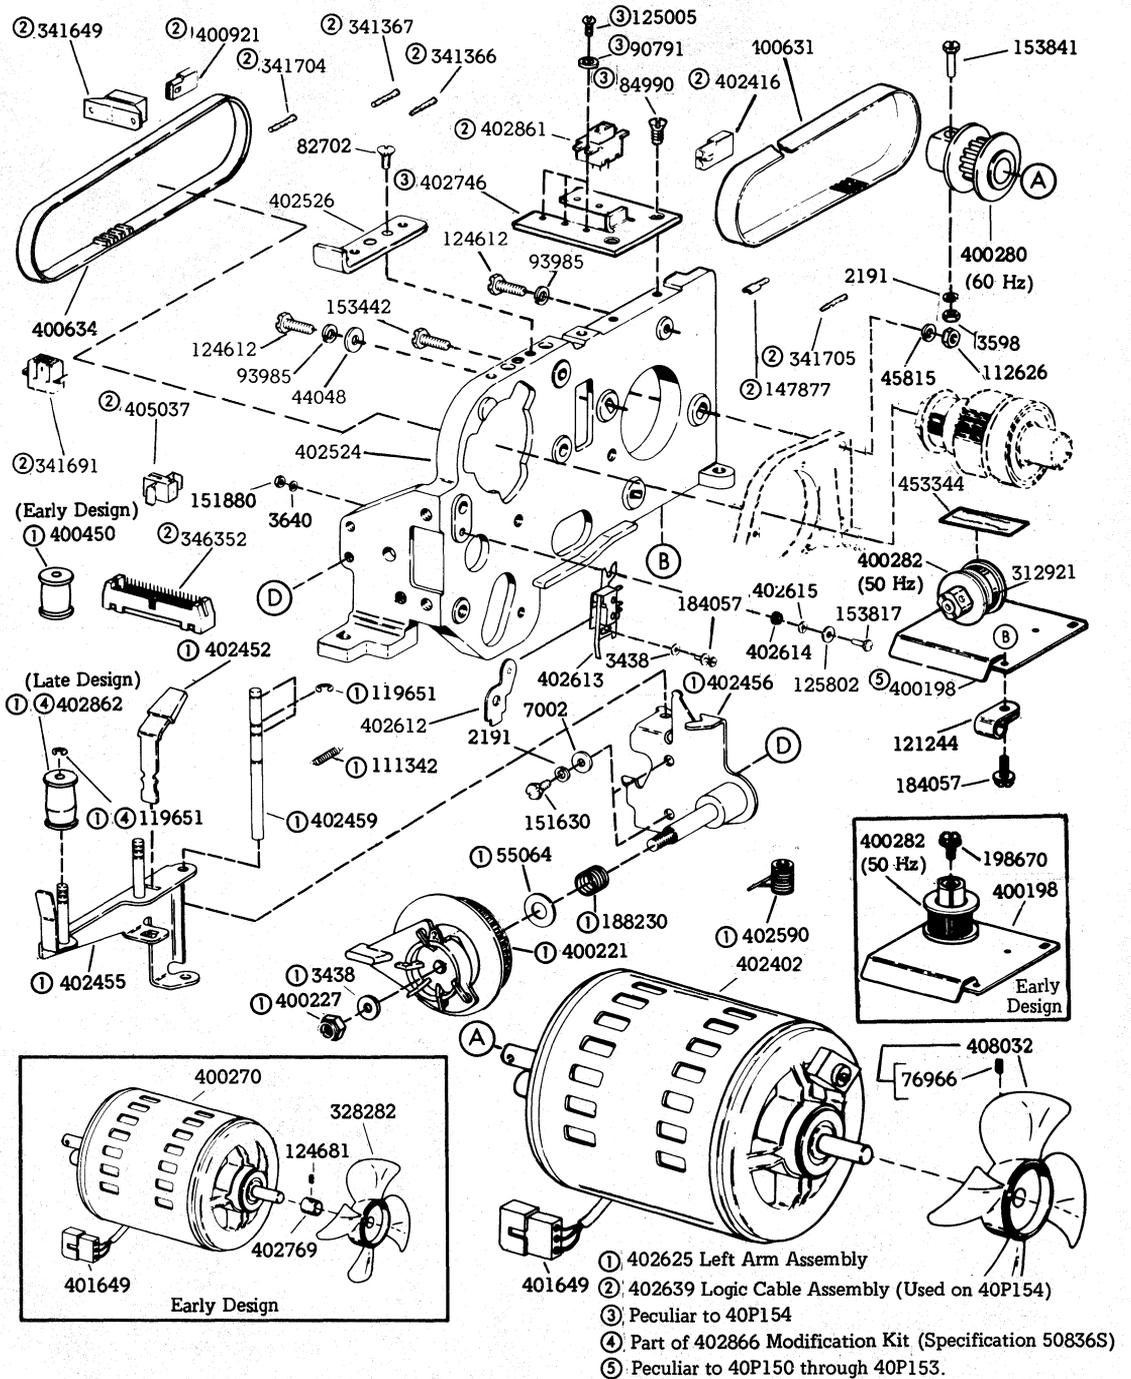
Left Casting Assembly and 402402 Motor (Tractor Feed – 80-Column)
